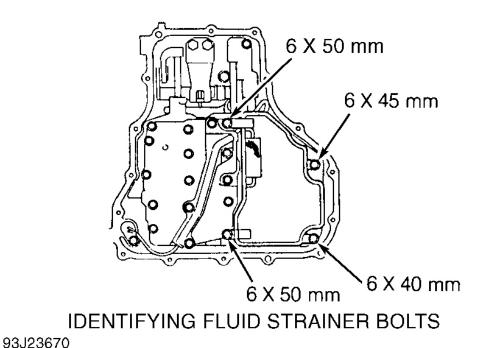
Lower Valve Body Assembly & Fluid Strainer Bolts (1 of 2) Courtesy of AMERICAN HONDA MOTOR CO., INC.
